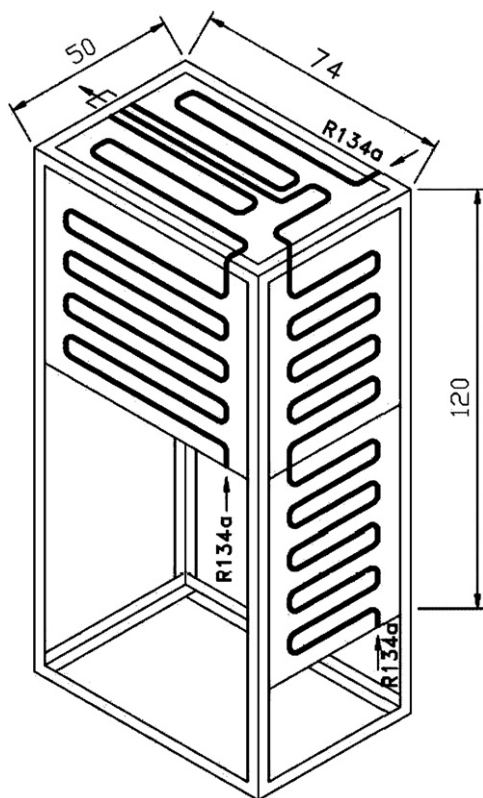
The heat pump, solar collector and the water storage tank combined to form a single unit drawn by Chyng et al. [17]. All dimensions are in cm.
